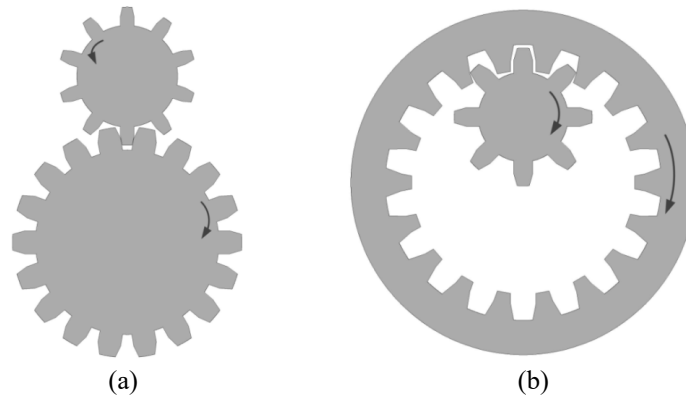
Mechanical (a) external and (b) internal spur gear.
